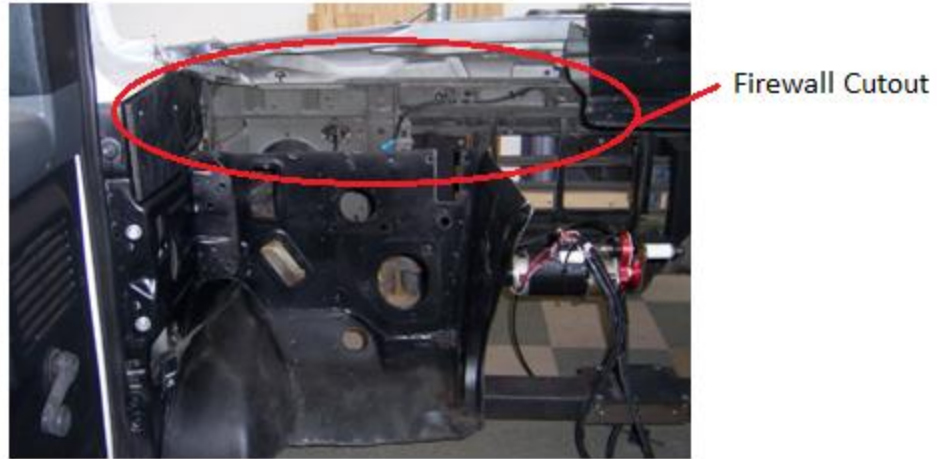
Firewall Cutout (courtesy of Matt Wills)
